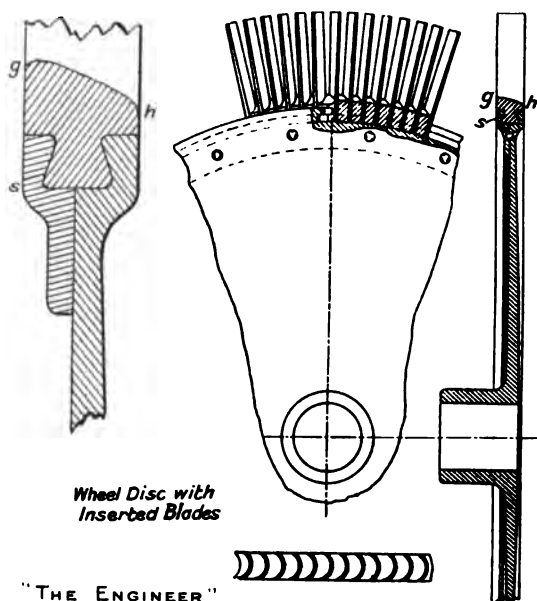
Revolving Wheel Disc with Blades inserted.
